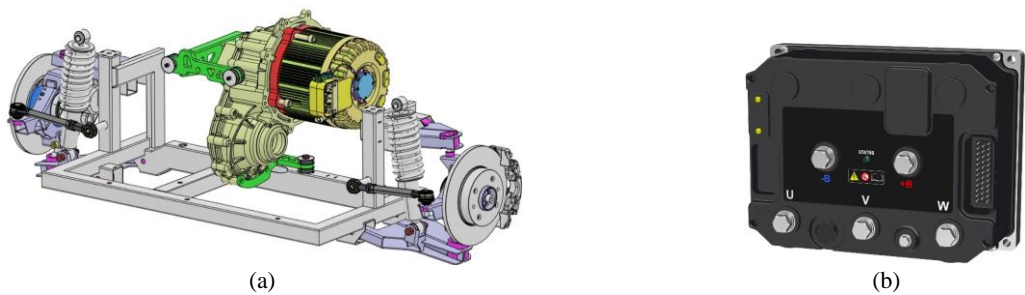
(a) 100 V motor and transmission assembly; (b) 100 V/375 A inverter.
